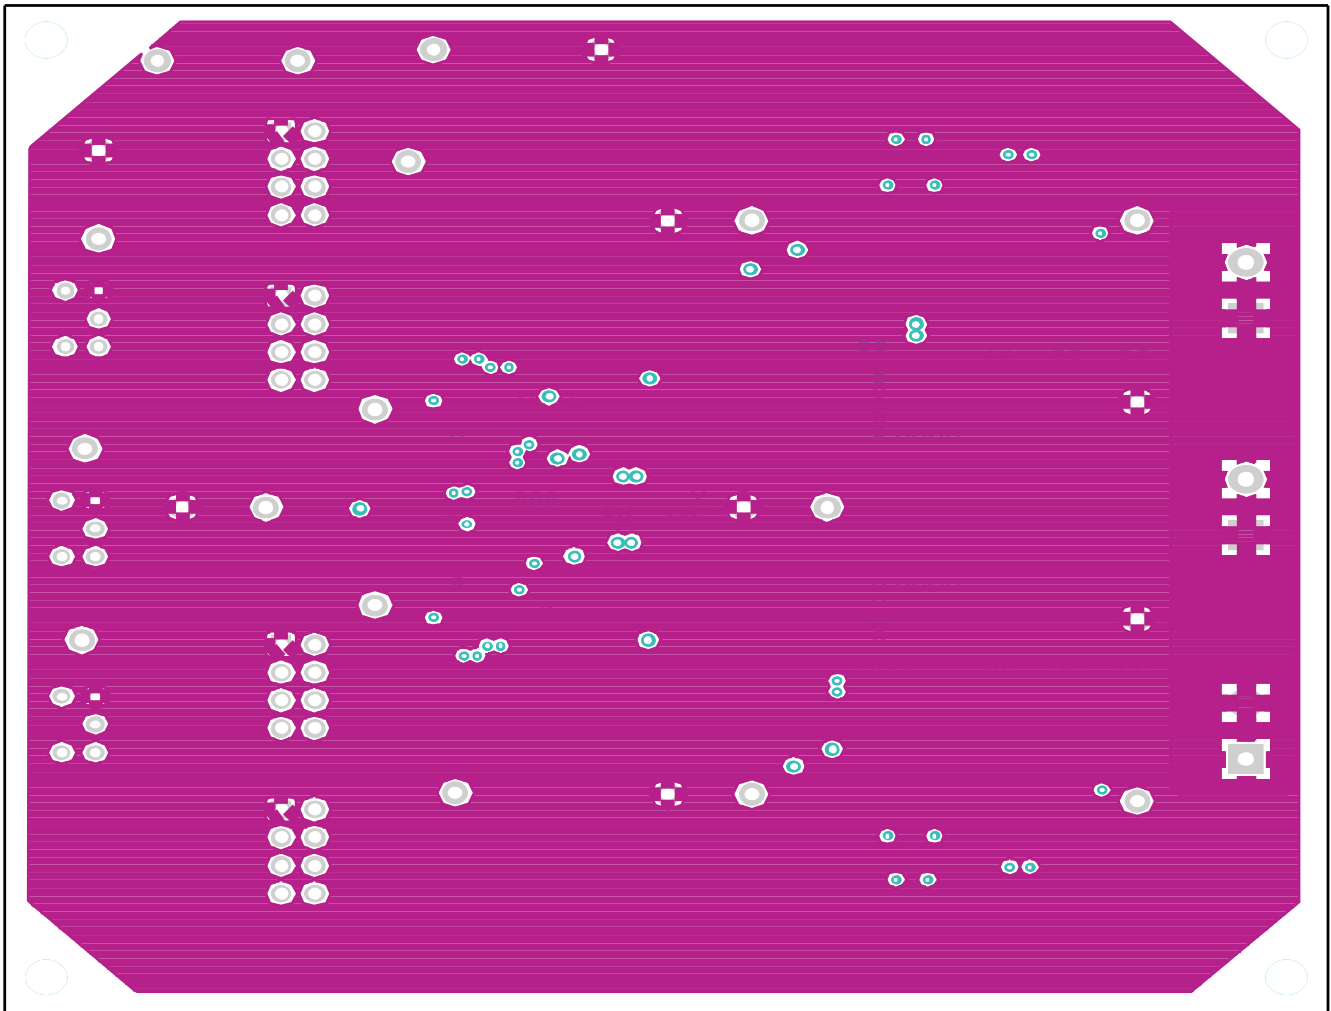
Bottom Assembly Drawing (Top View)
